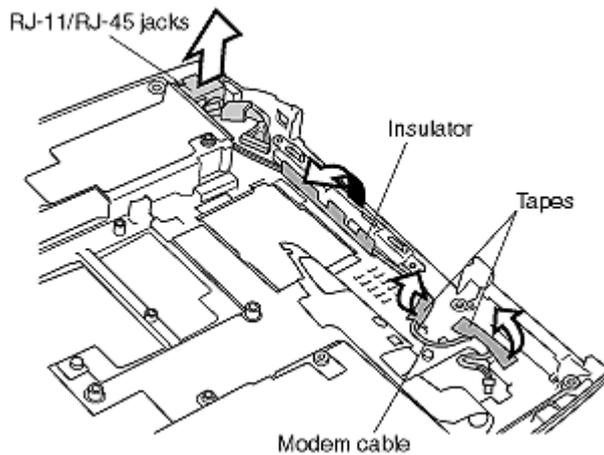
Removing the RJ-11/RJ-45 jacks
